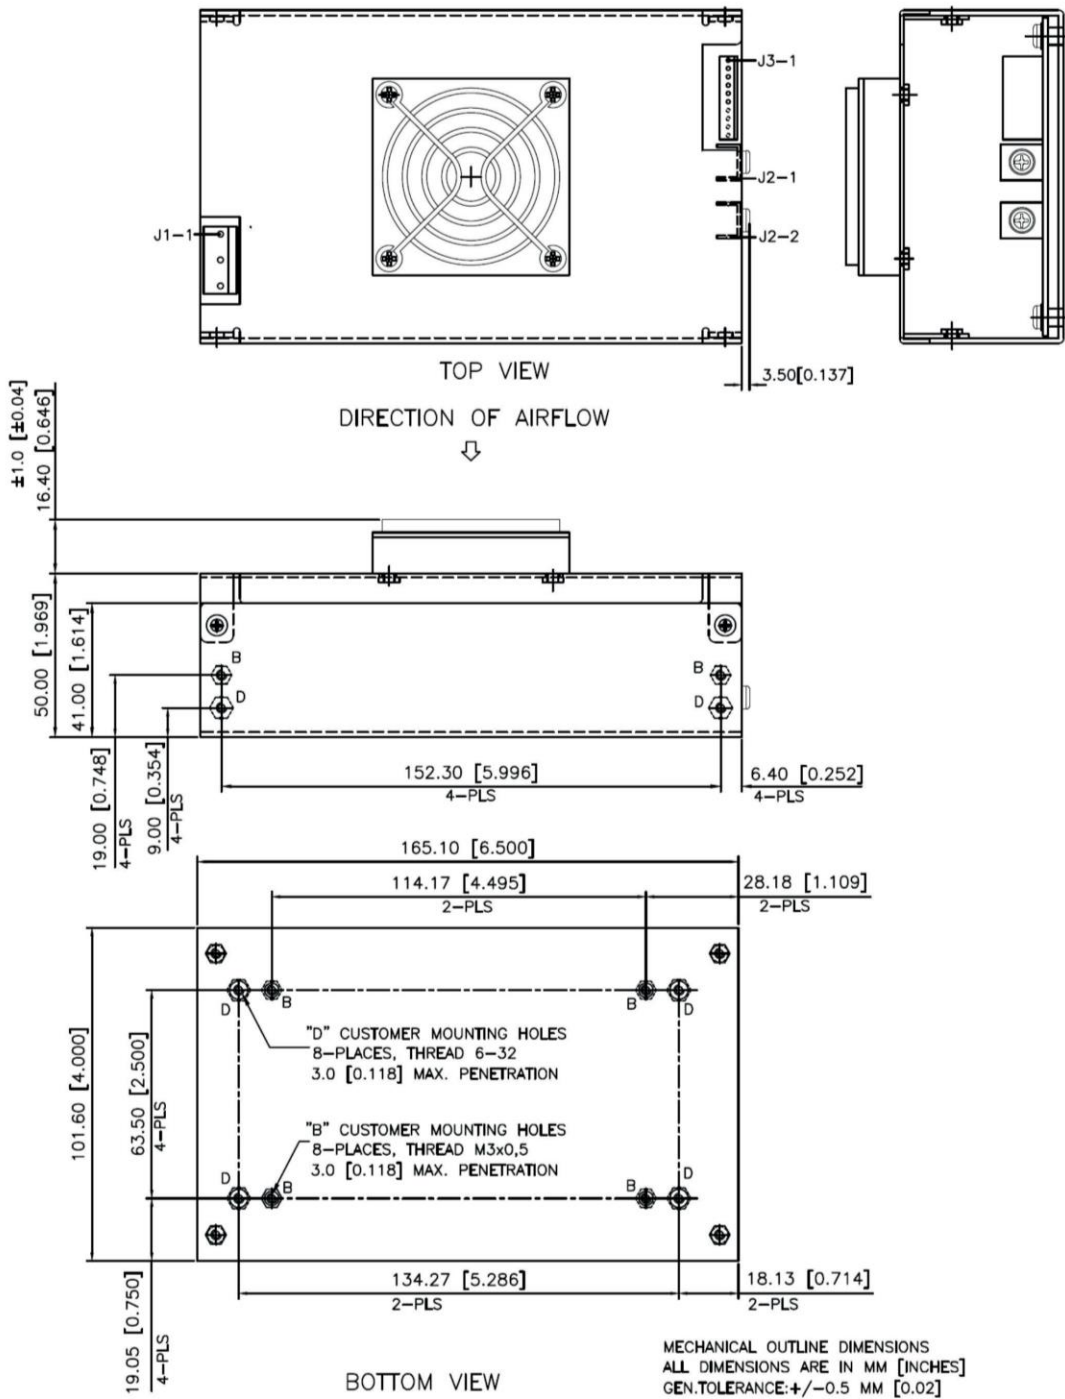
Mechanical Drawing (With Top Fan Mounting)
